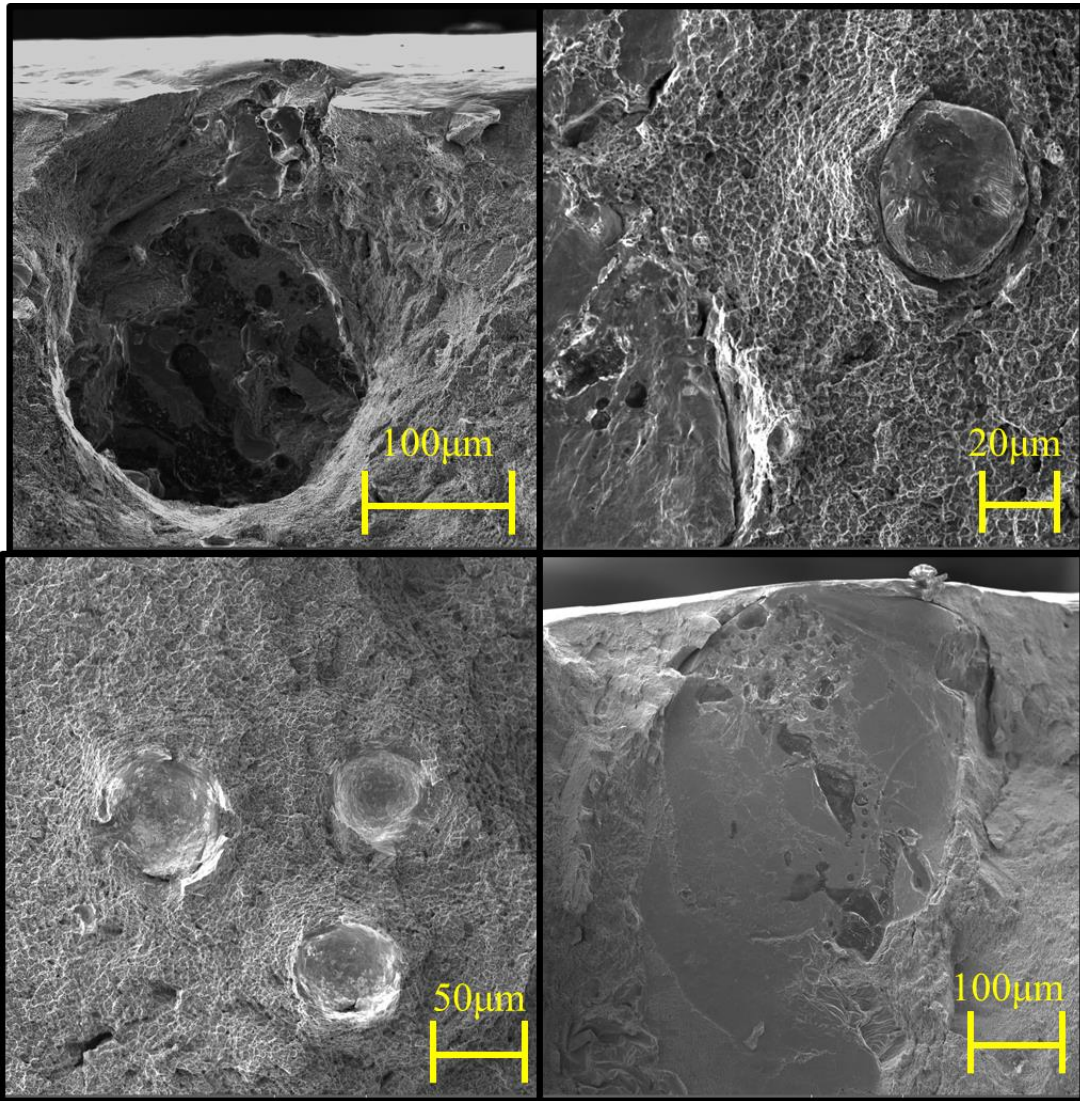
Fractography of SLM+EBW sample 17A/B (213.2 J/mm) fractured on the weld HAZ
